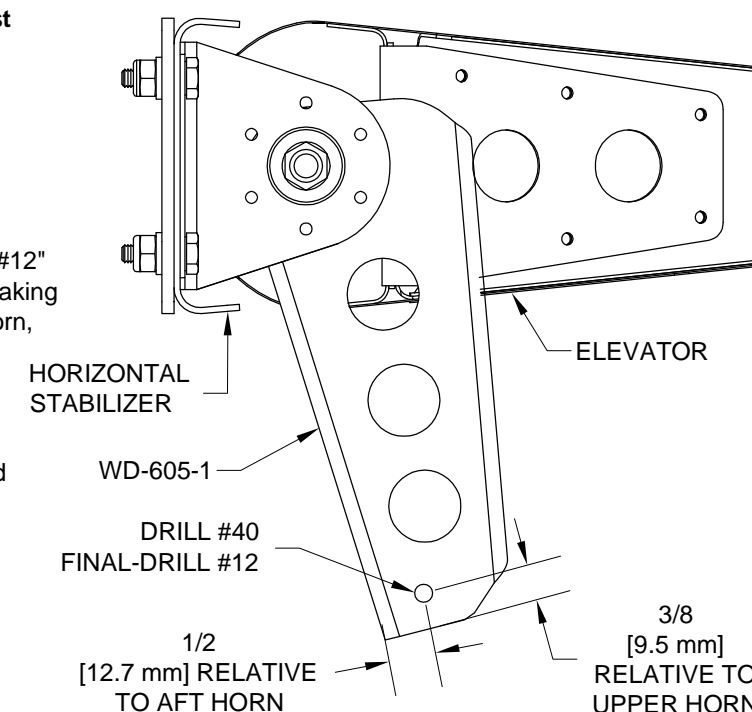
ELEVATOR PUSHROD BOLT HOLE
